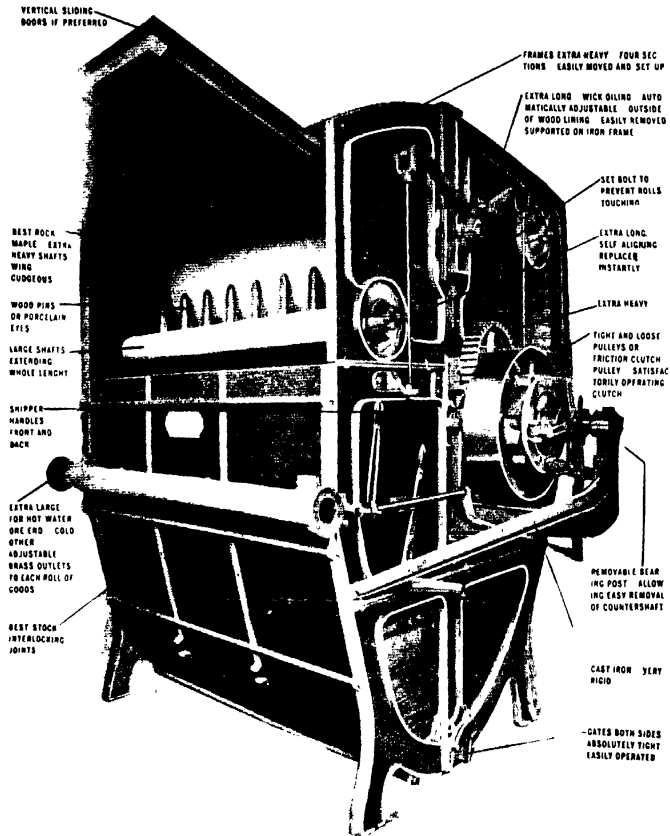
Scouring Machine for Cloth (Rodney Hunt).
